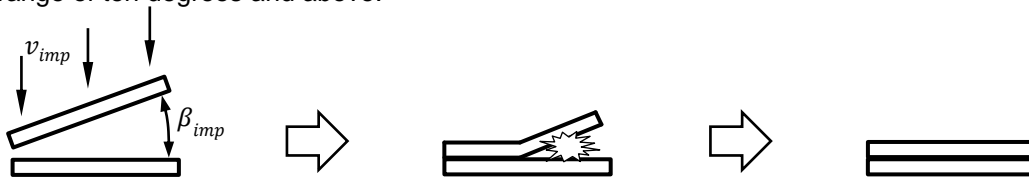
Schematic illustration of an impact welding process.[8]
